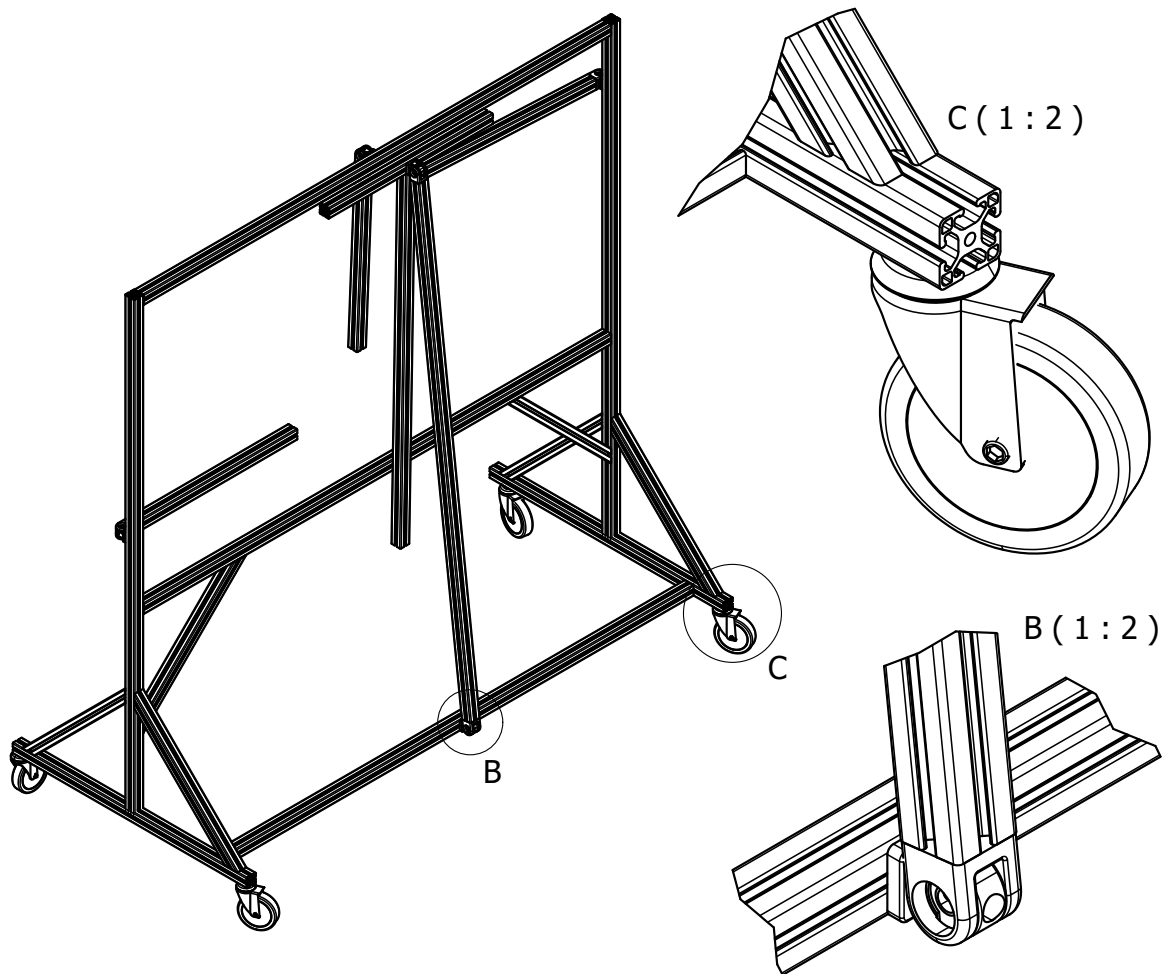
Lightboard ready folded with detail view of the hinge and caster that is used
